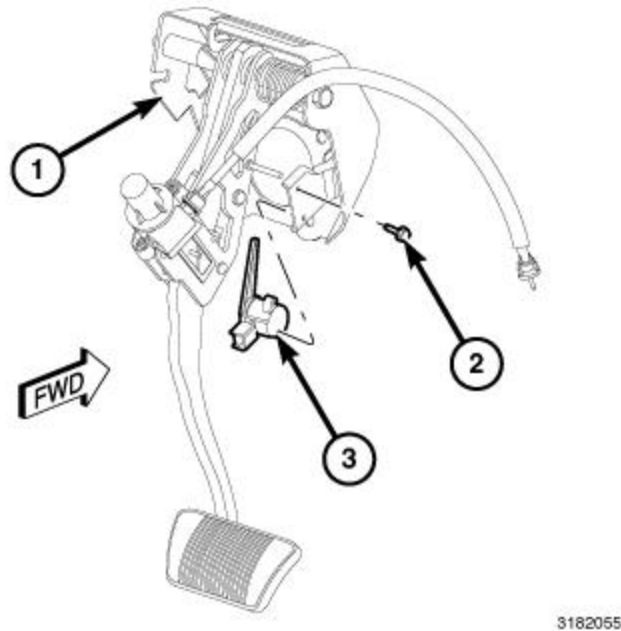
Screw, Brake Pedal Position Sensor & Brake Pedal Support Bracket
